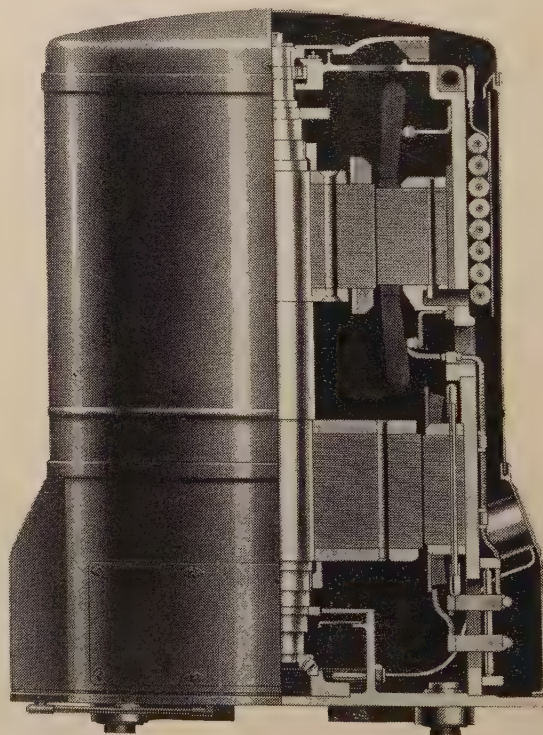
Half sectioned view of an A.E.I. m.f. vertical spindle motor alternator, a type involving reduced floor space and less heavily loaded bearings
